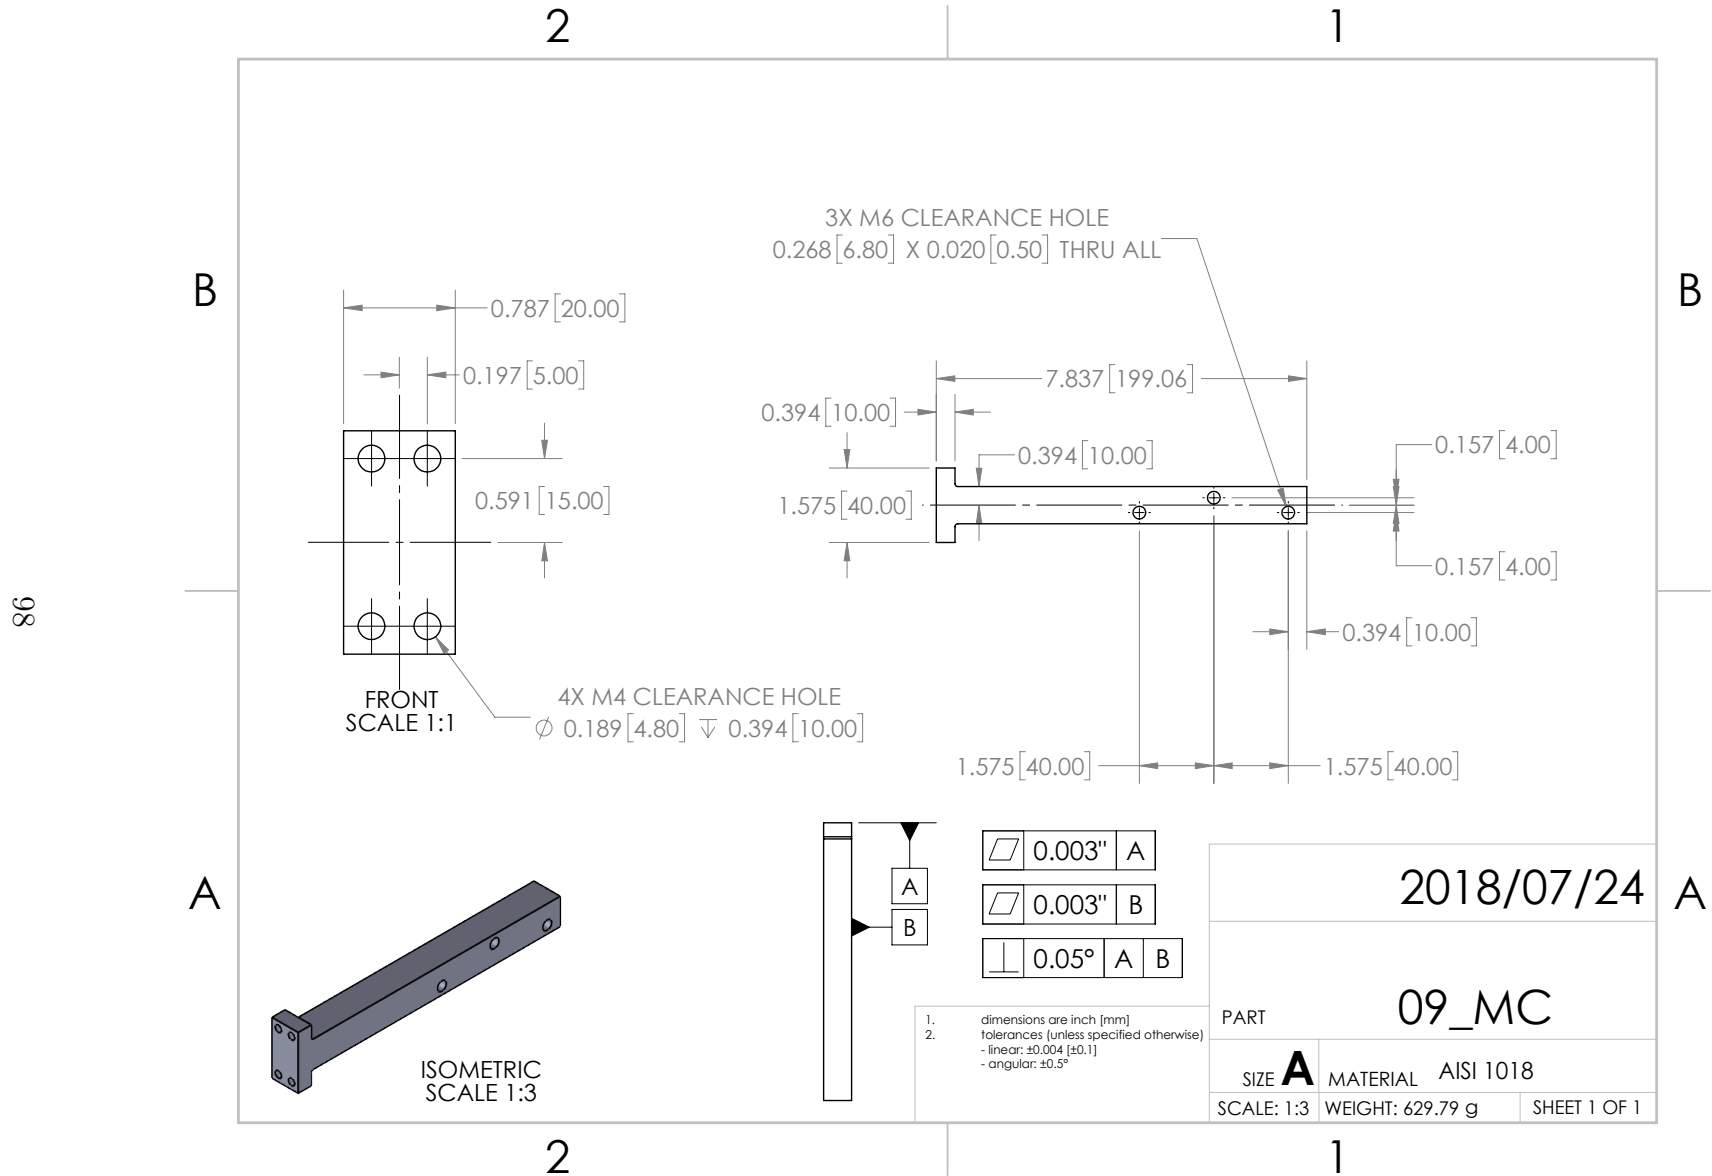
Fixture arm for mounting both a sample fixture (08_MC) and the clamp for the capacitance sensor target (13_MC).
